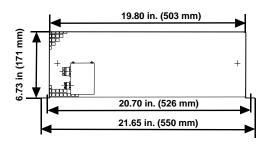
Mounting Dimensions for 460V External Shunt (P/N M.1302.7060)
